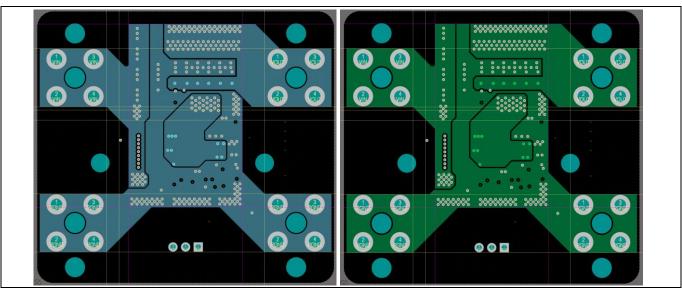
PCB layout mid-layer 2 (left) and mid-layer 3 (right)
